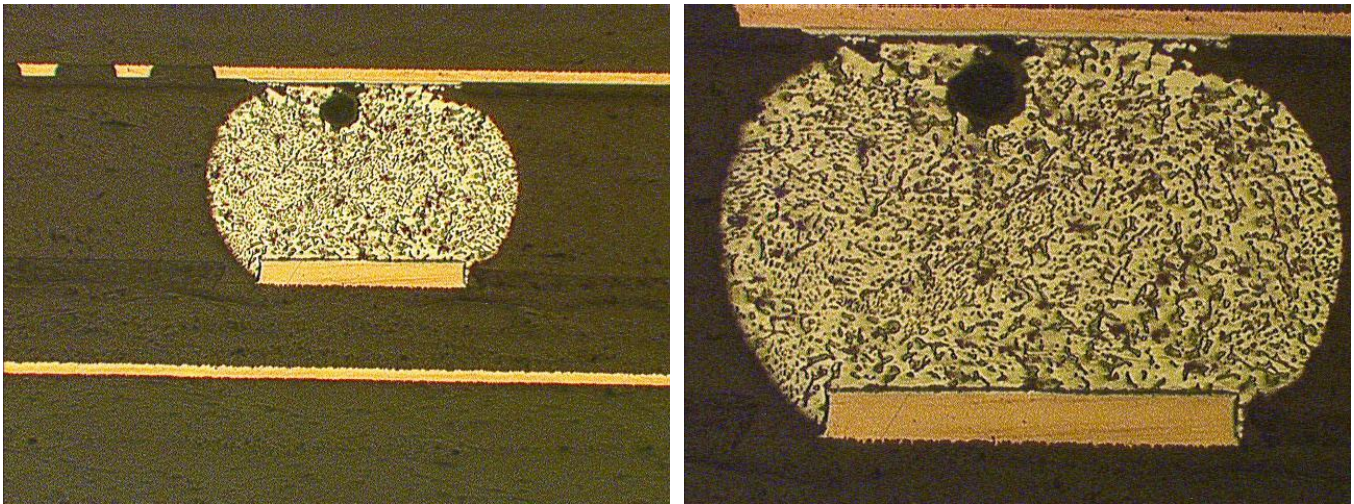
PBGA-225 Solder Joints, Board 8, Component U5, SnPb/SnPb, Failed @ 2431 Cycles
